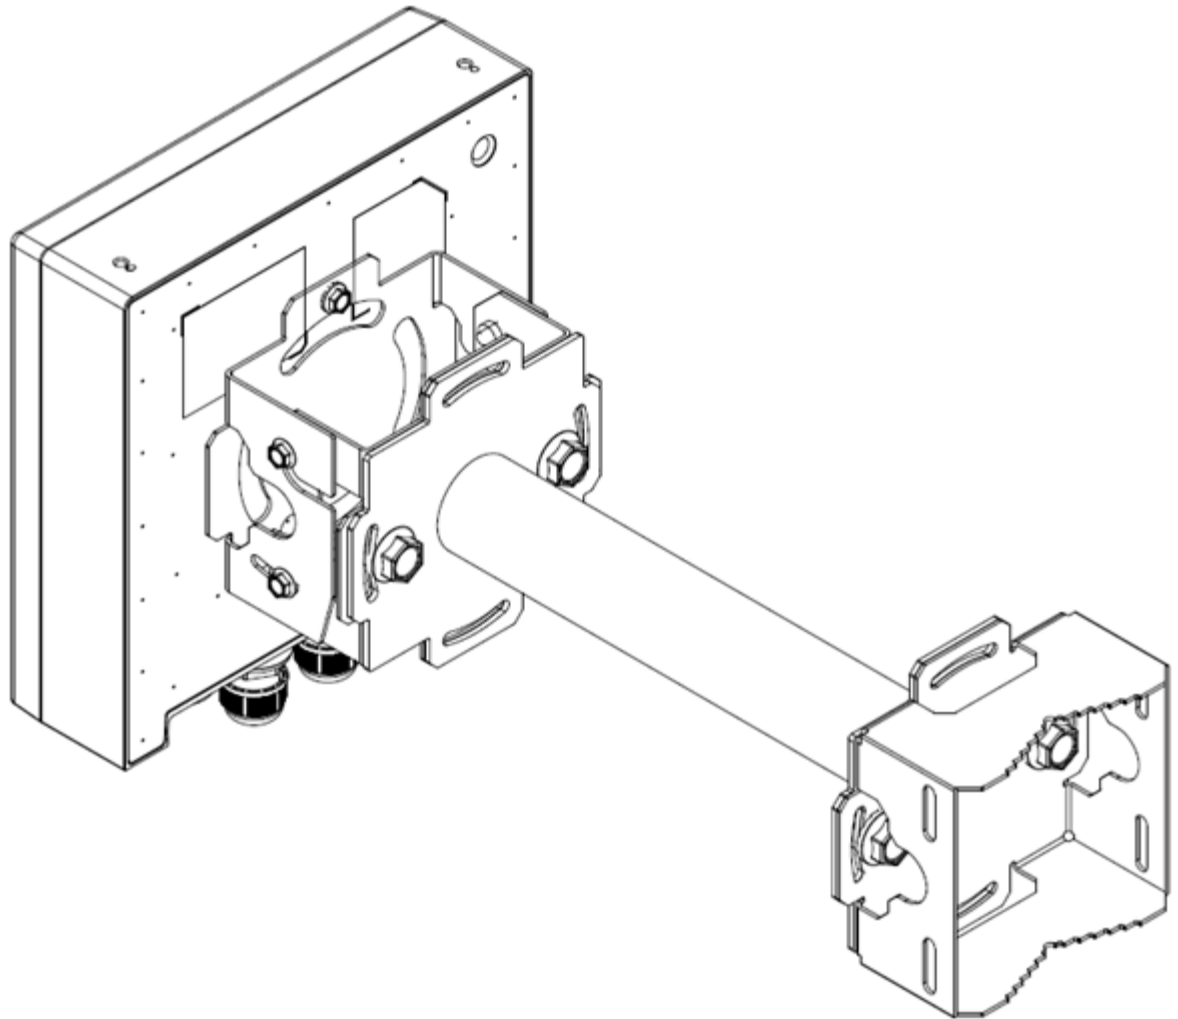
Attaching the KT-150173-01 extension arm to the 1-axis tilt part of the KT-147407-02 bracket
